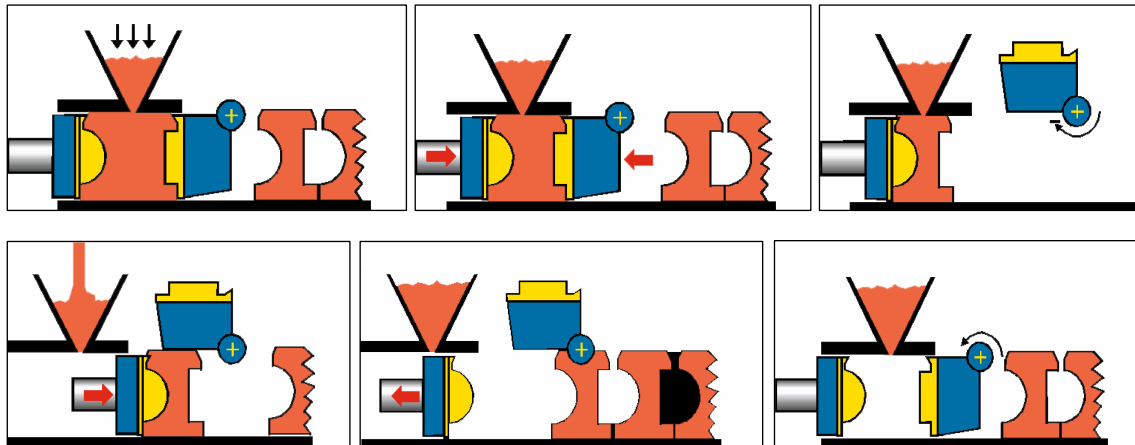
DISAMATIC working principle, yellow parts are the pattern plates [Ref. 3.2].
